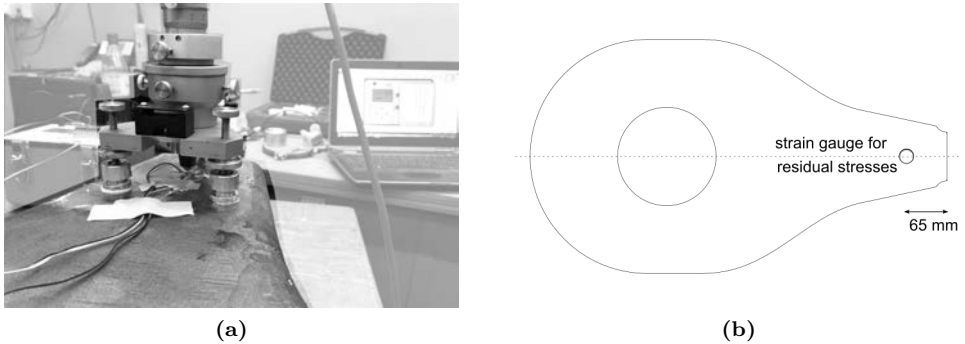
a) Test setup and milling guide for residual stress measurement using the hole-drilling strain-gauge method; b) Position of the strain measurement in the large specimen
